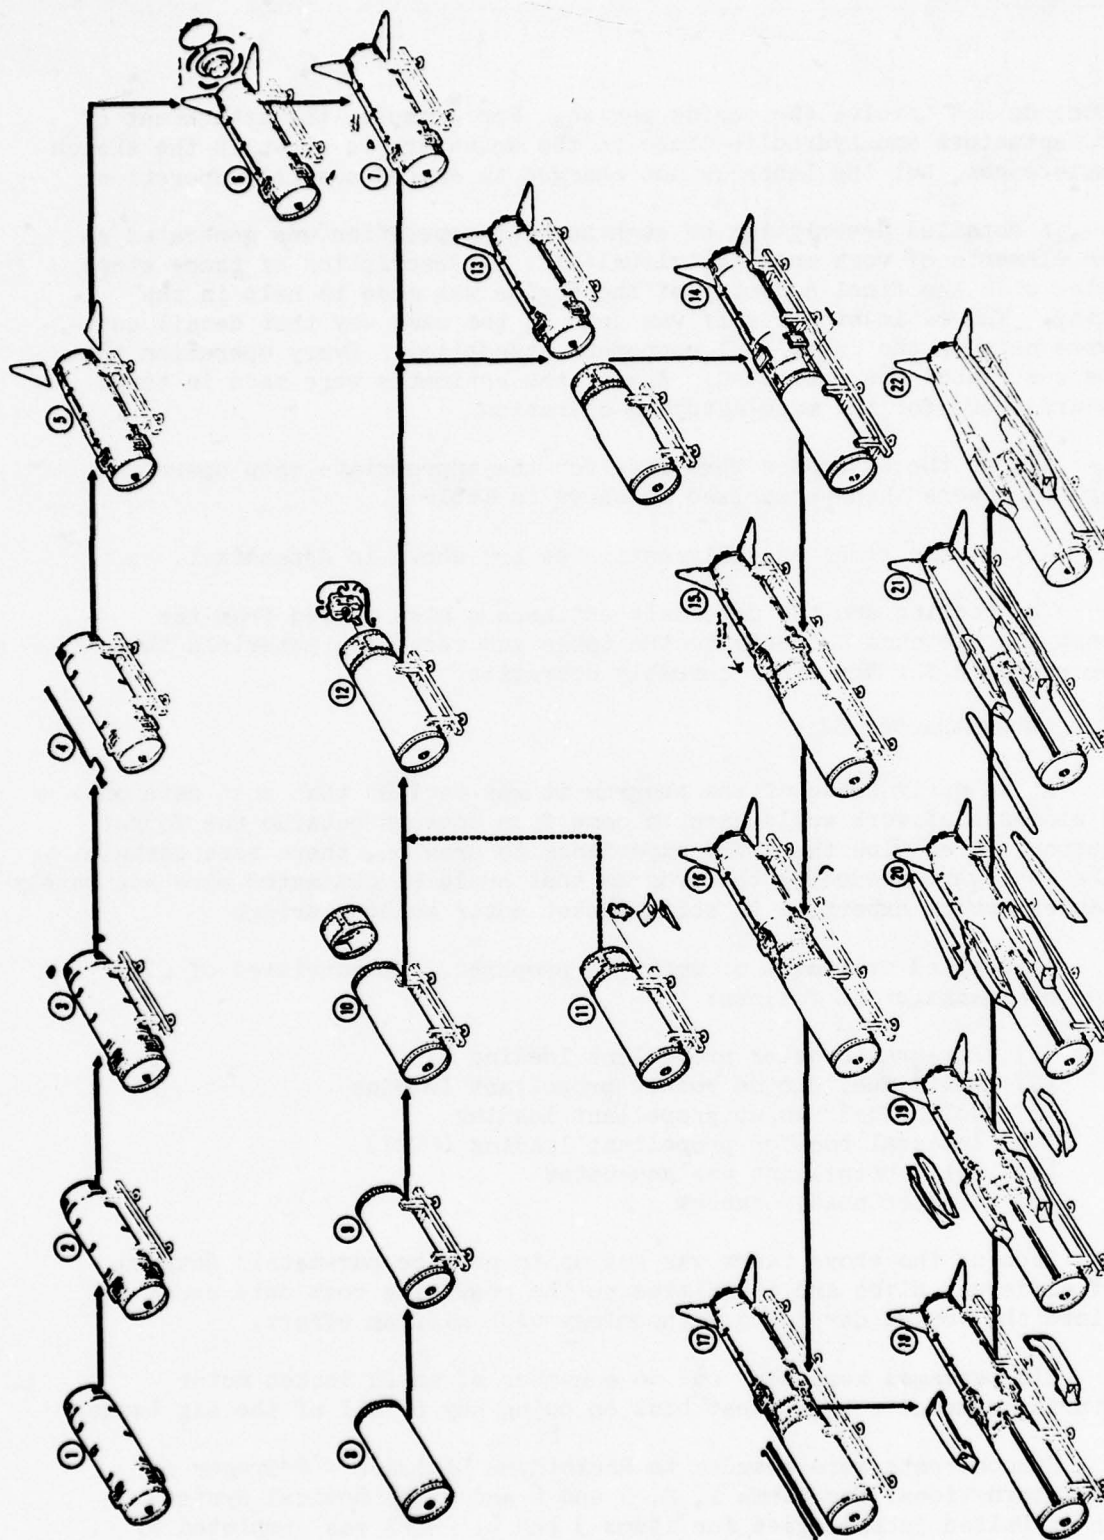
LIQUID FUEL RAMJET - IRR - FINAL ASSEMBLY
